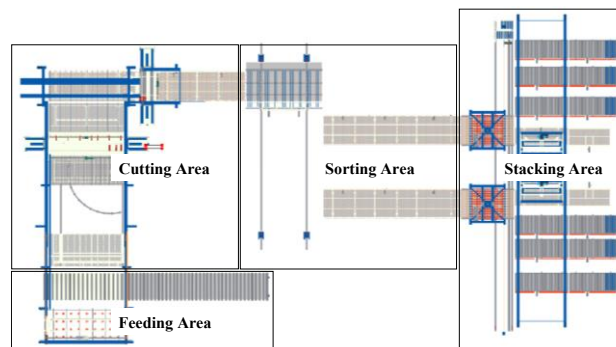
Exemplary cut-to-size plant layout with units for feeding the plant, cutting, sorting, and stacking grouped into areas
